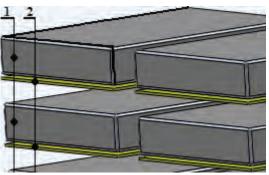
Construction of the heat storage system; 1 - containers with Glauber's salt; 2 - PCB heaters.
